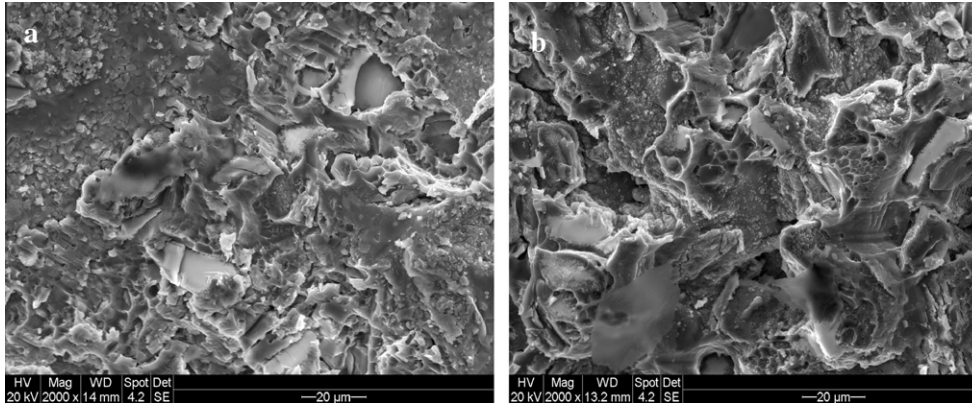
SEM image of the fractured surfaces of joints made using the 5 μm thick coatings at (a) 570 °C and (b) 590 °C.
